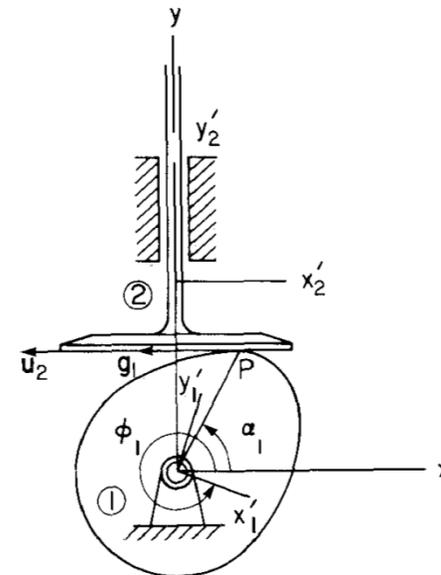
Cam-flat-faced follower in an internal combustion engine.
